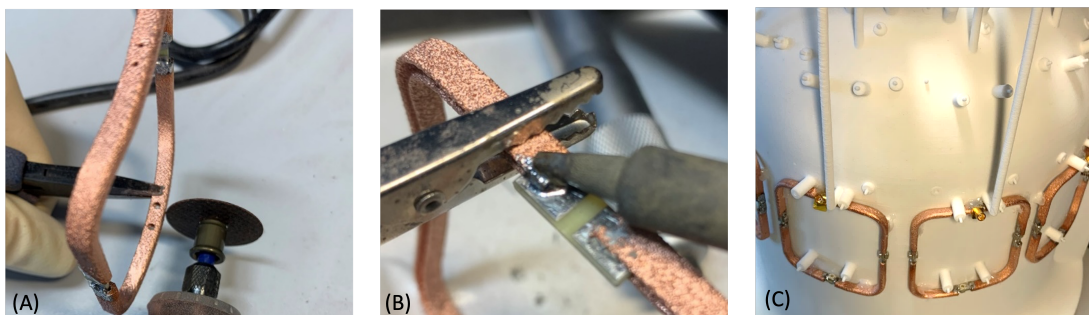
Loop mounting process. (A) The loop is cut at the position of the hole. (B) A small PCB is added between the two pieces to solder a capacitor. (C) Loop positioning on the helmet with placement studs.
